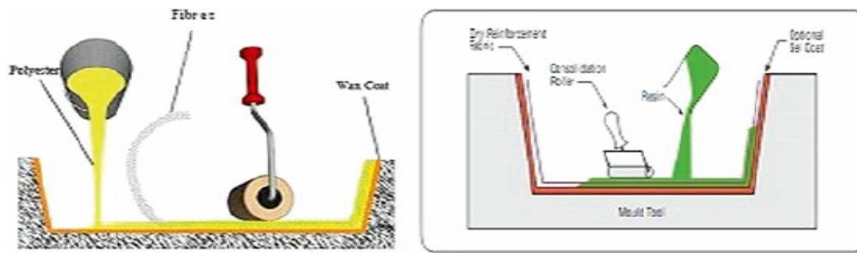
Shows the hand layup fabrication technique for composite materials.
